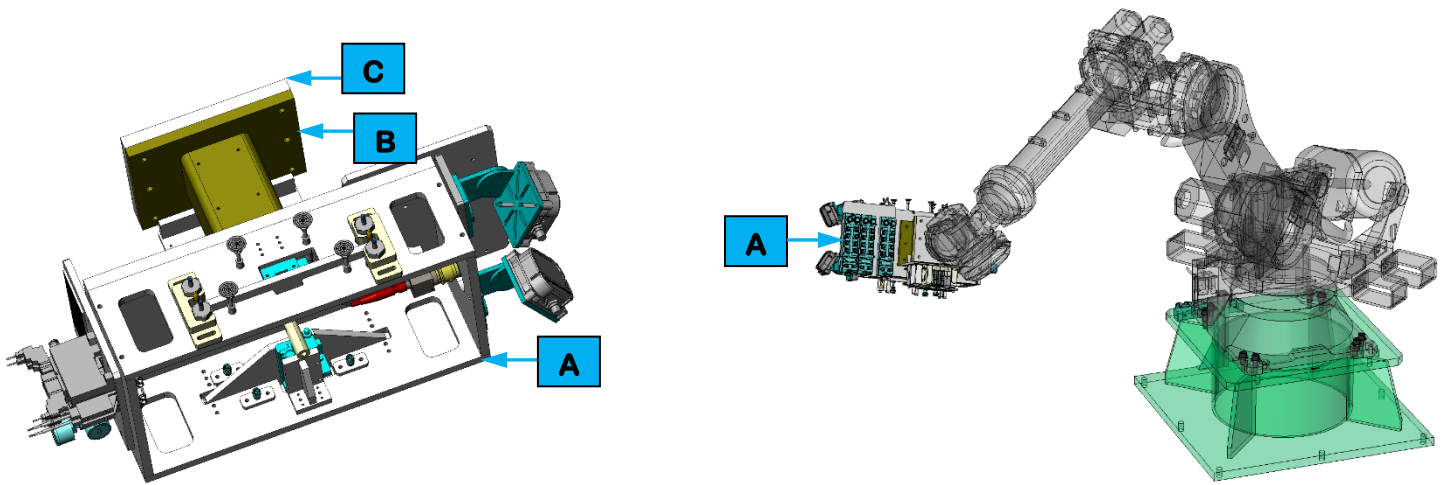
Illustrations of the weld contact tool removal.
